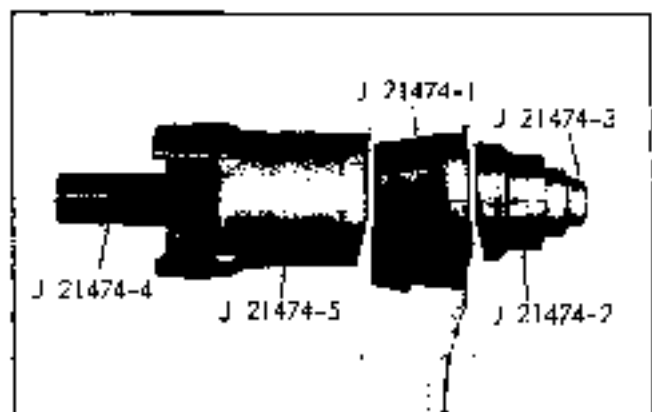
Installing Upper Control Arm Rear Bushing - Pontiac and Tempest
